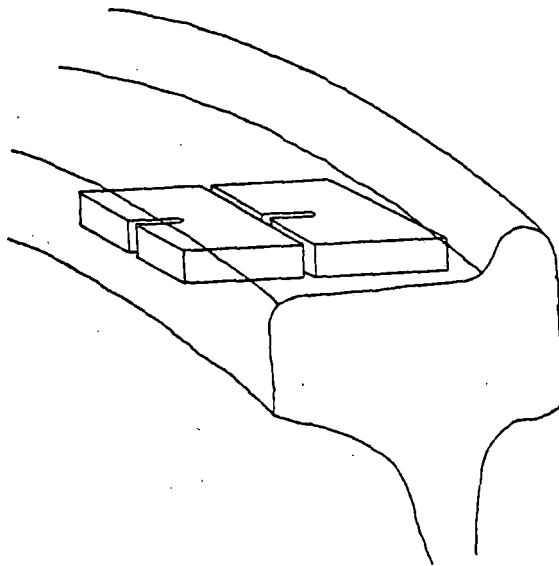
Orientation of Crack Arrest Specimens in Wheel Rim.
